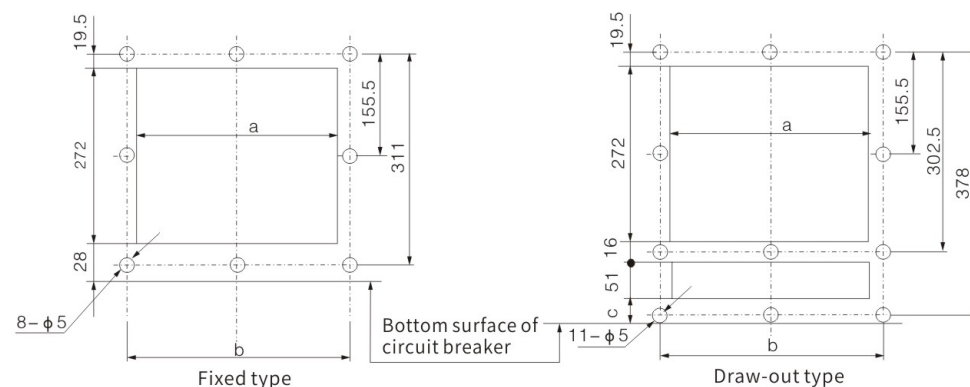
Outline and installation dimension of the draw-out type circuit breaker (W1-6300/4 In=6300A)
